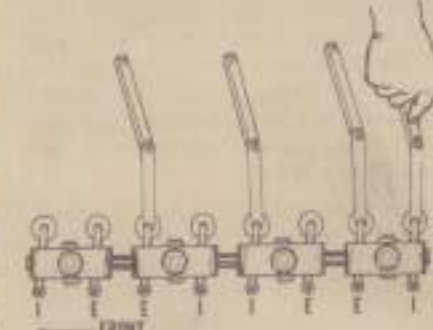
A—D-15 diesel. With number 4 piston at TDC on compression stroke, valve clearances (tappet gap) can be set on the four valves indicated. Refer also to Fig. 33.
